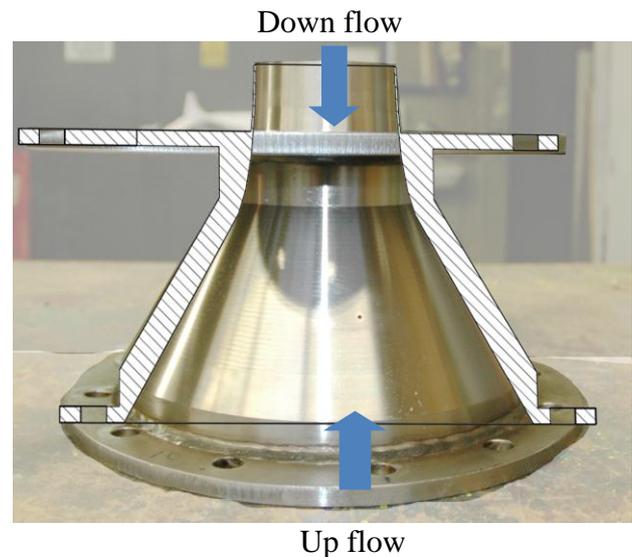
Asymmetric Throttle stainless steel, section cut and full view
